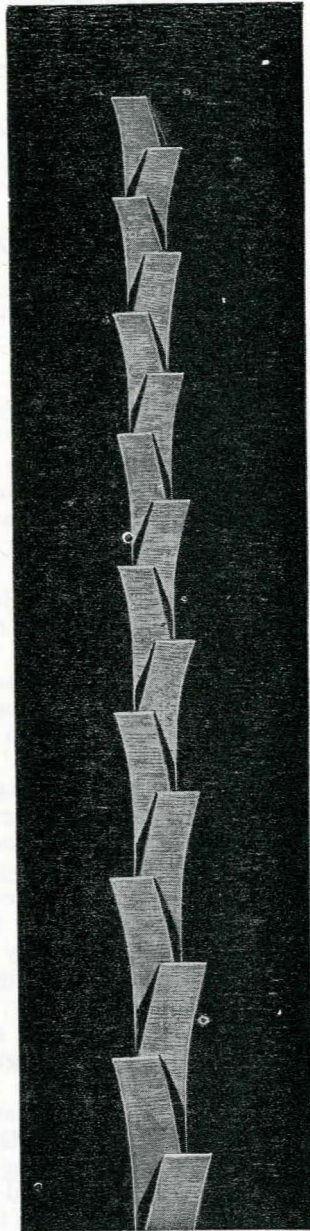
AN ENLARGED VIEW OF THE CUTTING EDGE OF A RIPSAW
